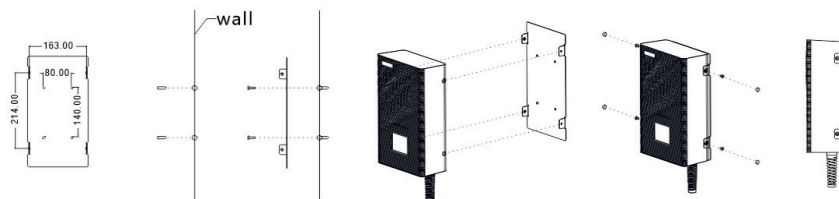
Installation drawing of TELESTAR EC 311 S charging station mounting plate
